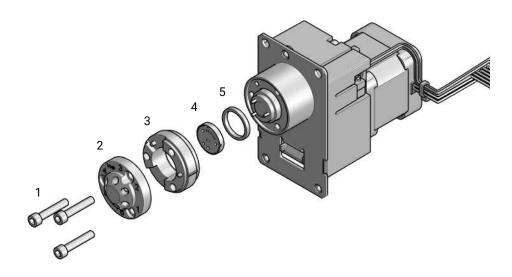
2 Position/6 Port Injection Valve 600 bar/800 bar
